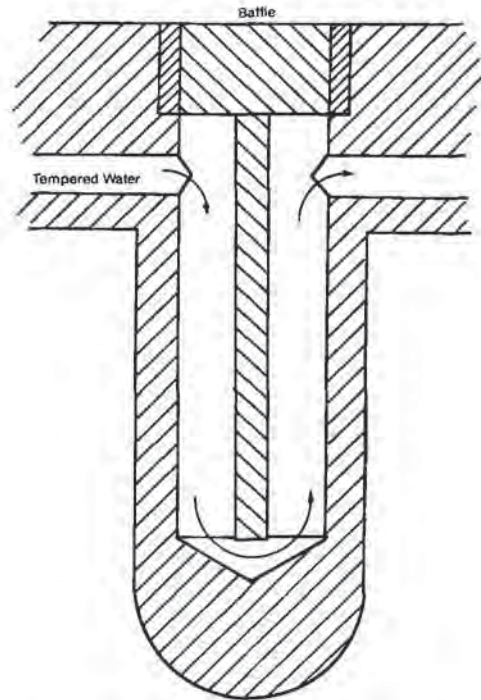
Schematic of hot water heated metal plug similar to injection mold bubbler
